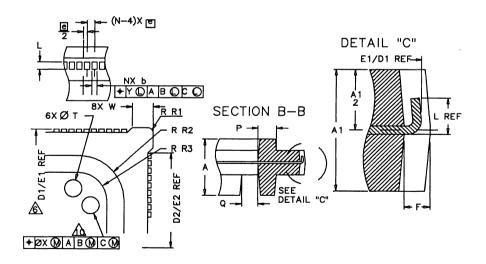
Molded carrier ring QFP, 208-lead customer package outline (3 of 4)
